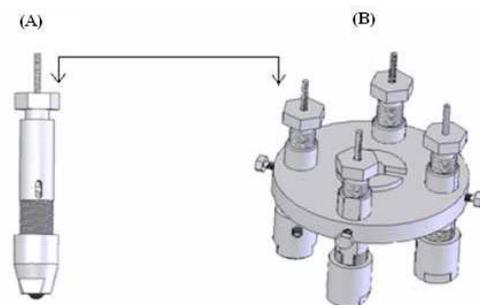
(A) The simple ball burnishing tool and the (B) tool holder with four ball burnishing tools.[7]
